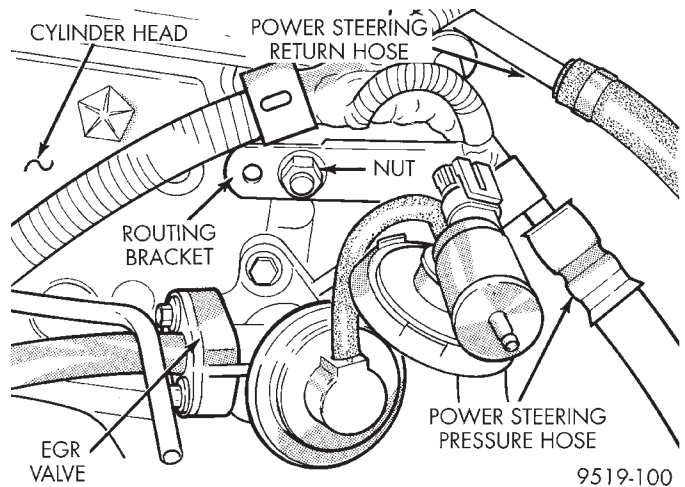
Power Steering Hose Bracket Attachment To Cylinder Head
